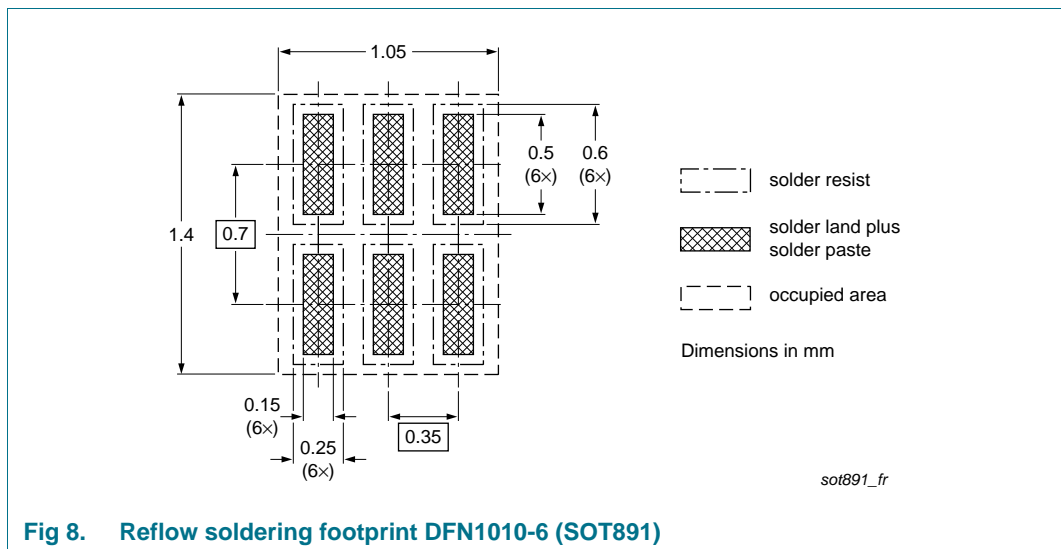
Reflow soldering footprint DFN1010-6 (SOT891)
